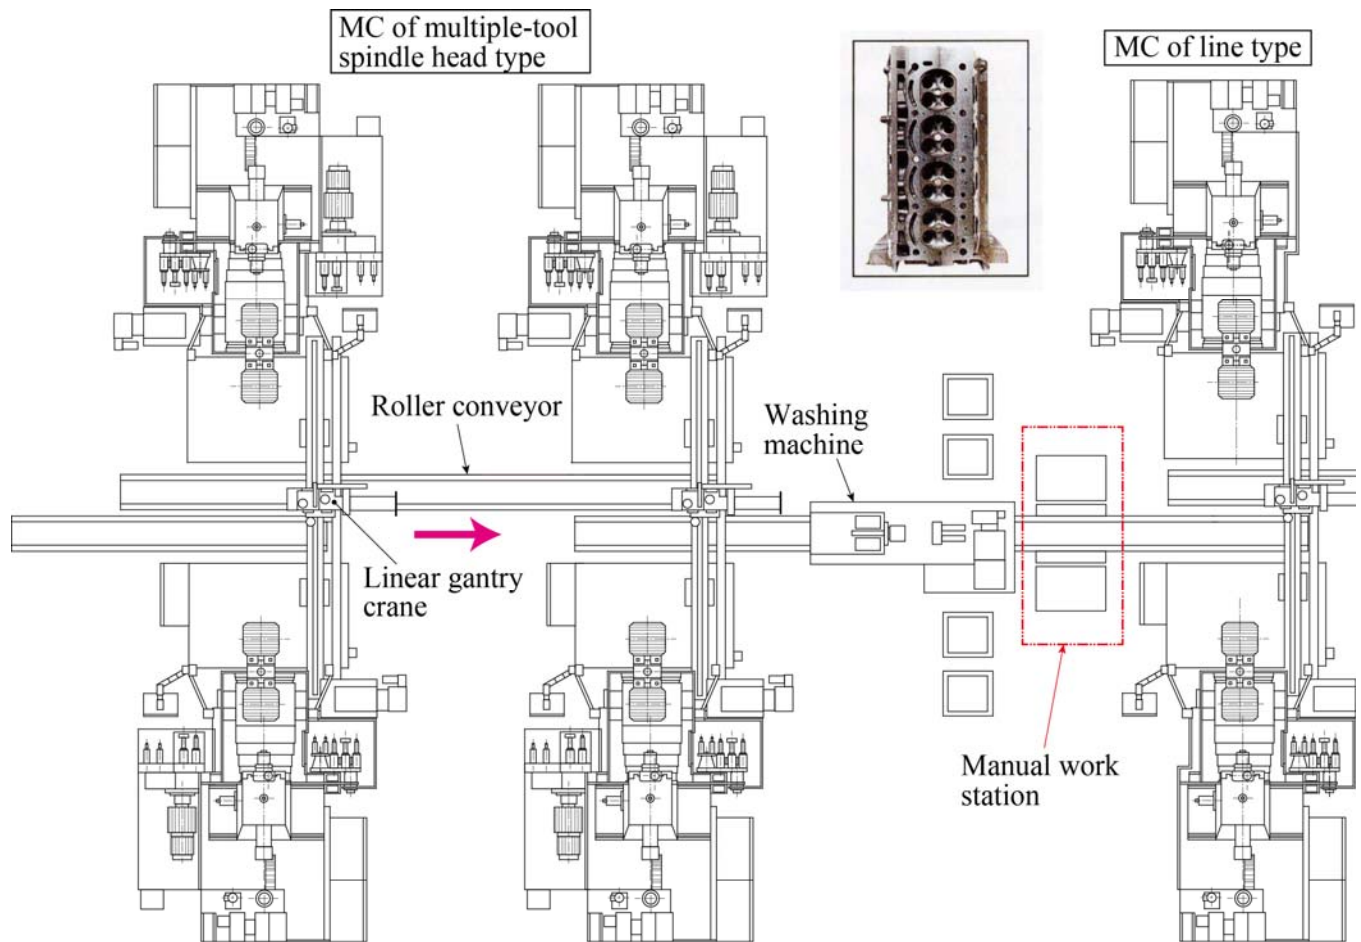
Flexible machining line for cylinder head - Fritz Wener, in 1993
